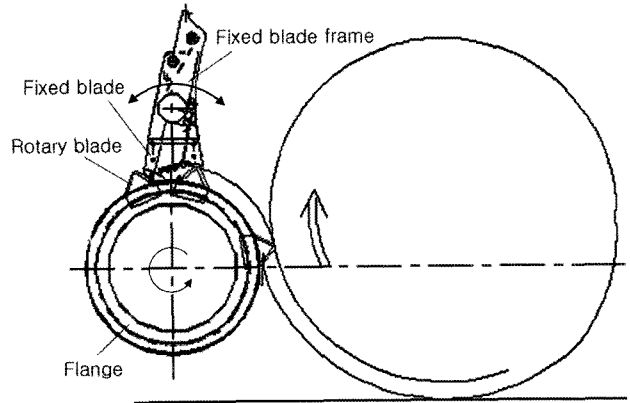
Cutting mechanism of the prototype cut-feeder.
